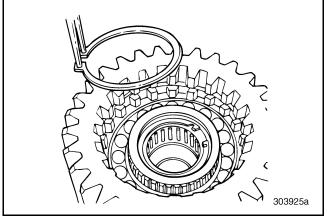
Installing Shaft Snap Ring (T313L/T318L Shown)
